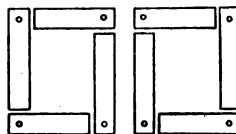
Layout of laminations in a layer of a transformer core during assembly
